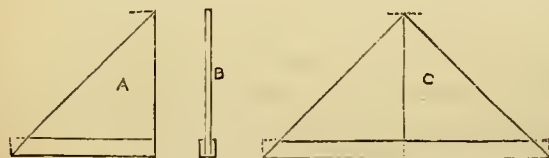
SHELVES. A, Front View; B, Side View; C, Bearings.
